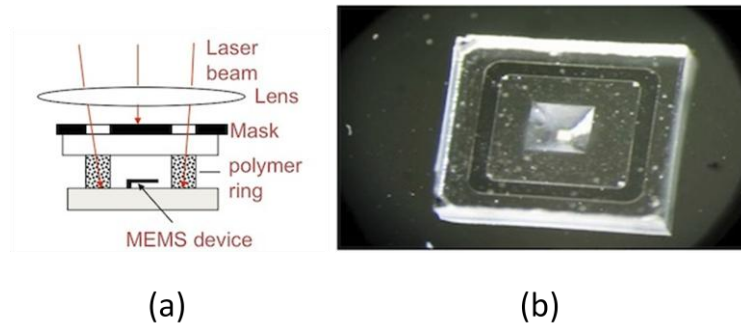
Glass welding with a polymer frit. (a) Laser heats polymer frit with mask. Adapted from Ref [2]. (b) The welded glass sample. Adapted from Ref [3].
